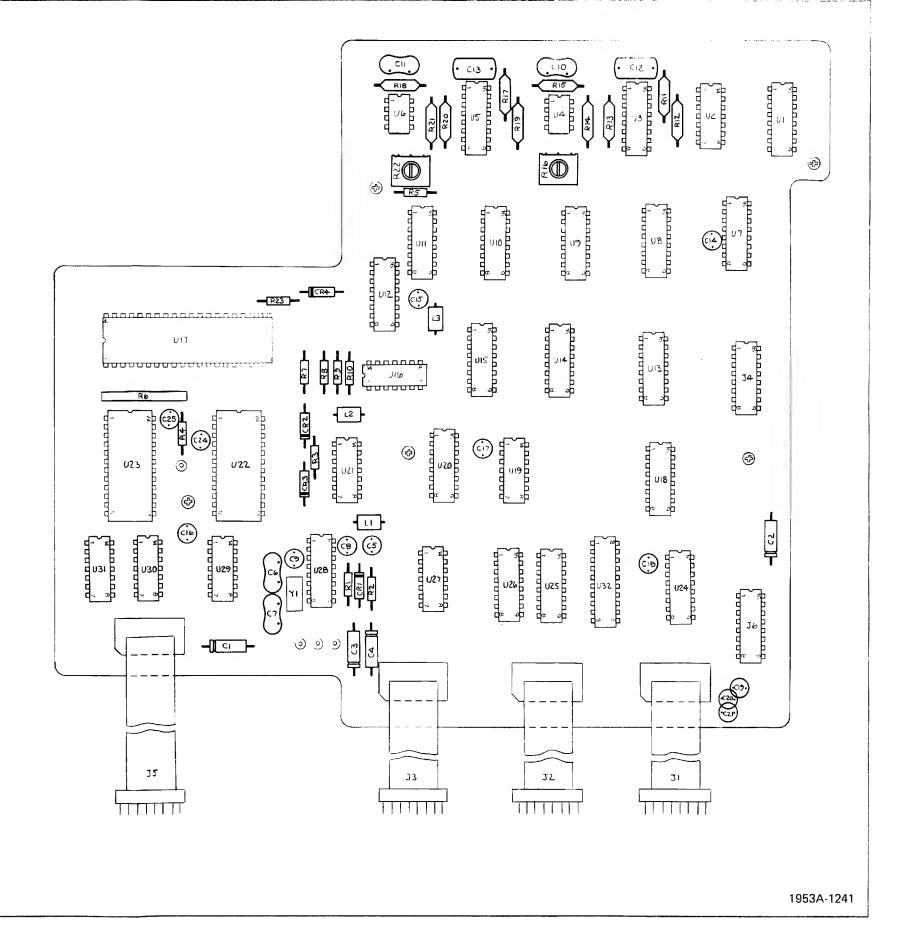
A17 IEEE-488-1975 Processor PCB Assembly, -15 Option
